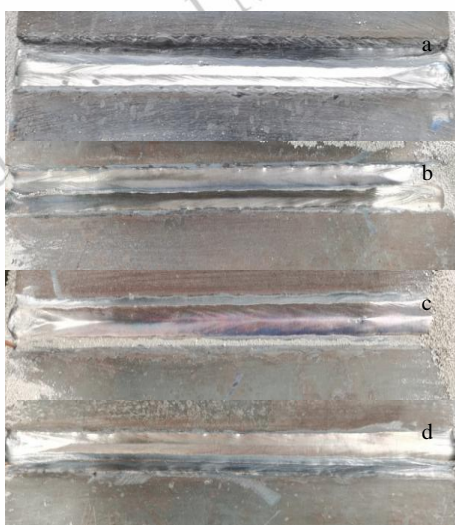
Appearance of the Deposited Metal Weld Bead
